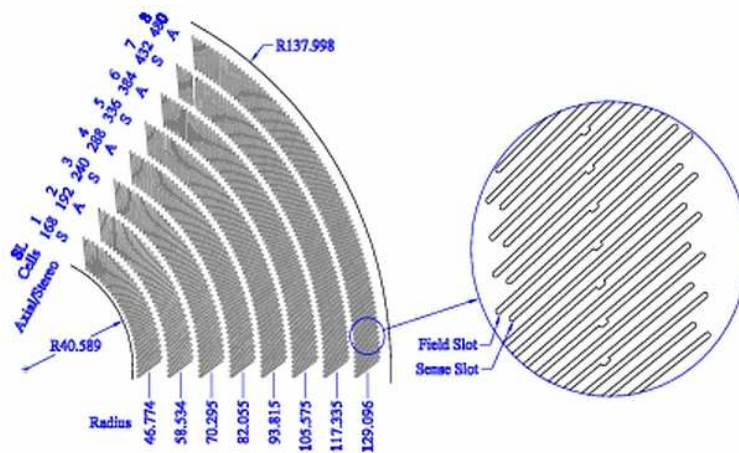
COT section: the eight superlayers (left) and the alternation of field plates and wire planes (right)
